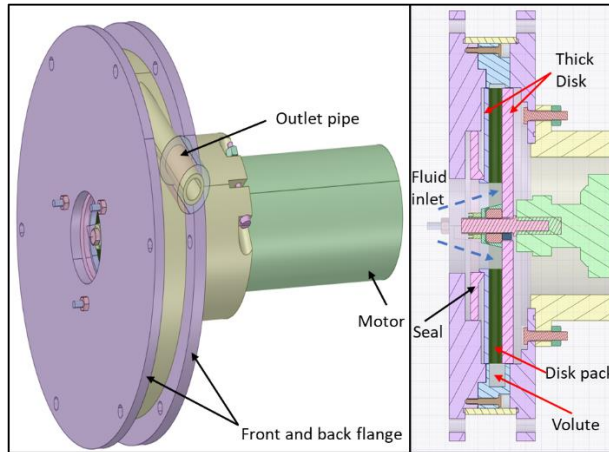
Reversible Tesla machine: 3D and cross-sectional view.
